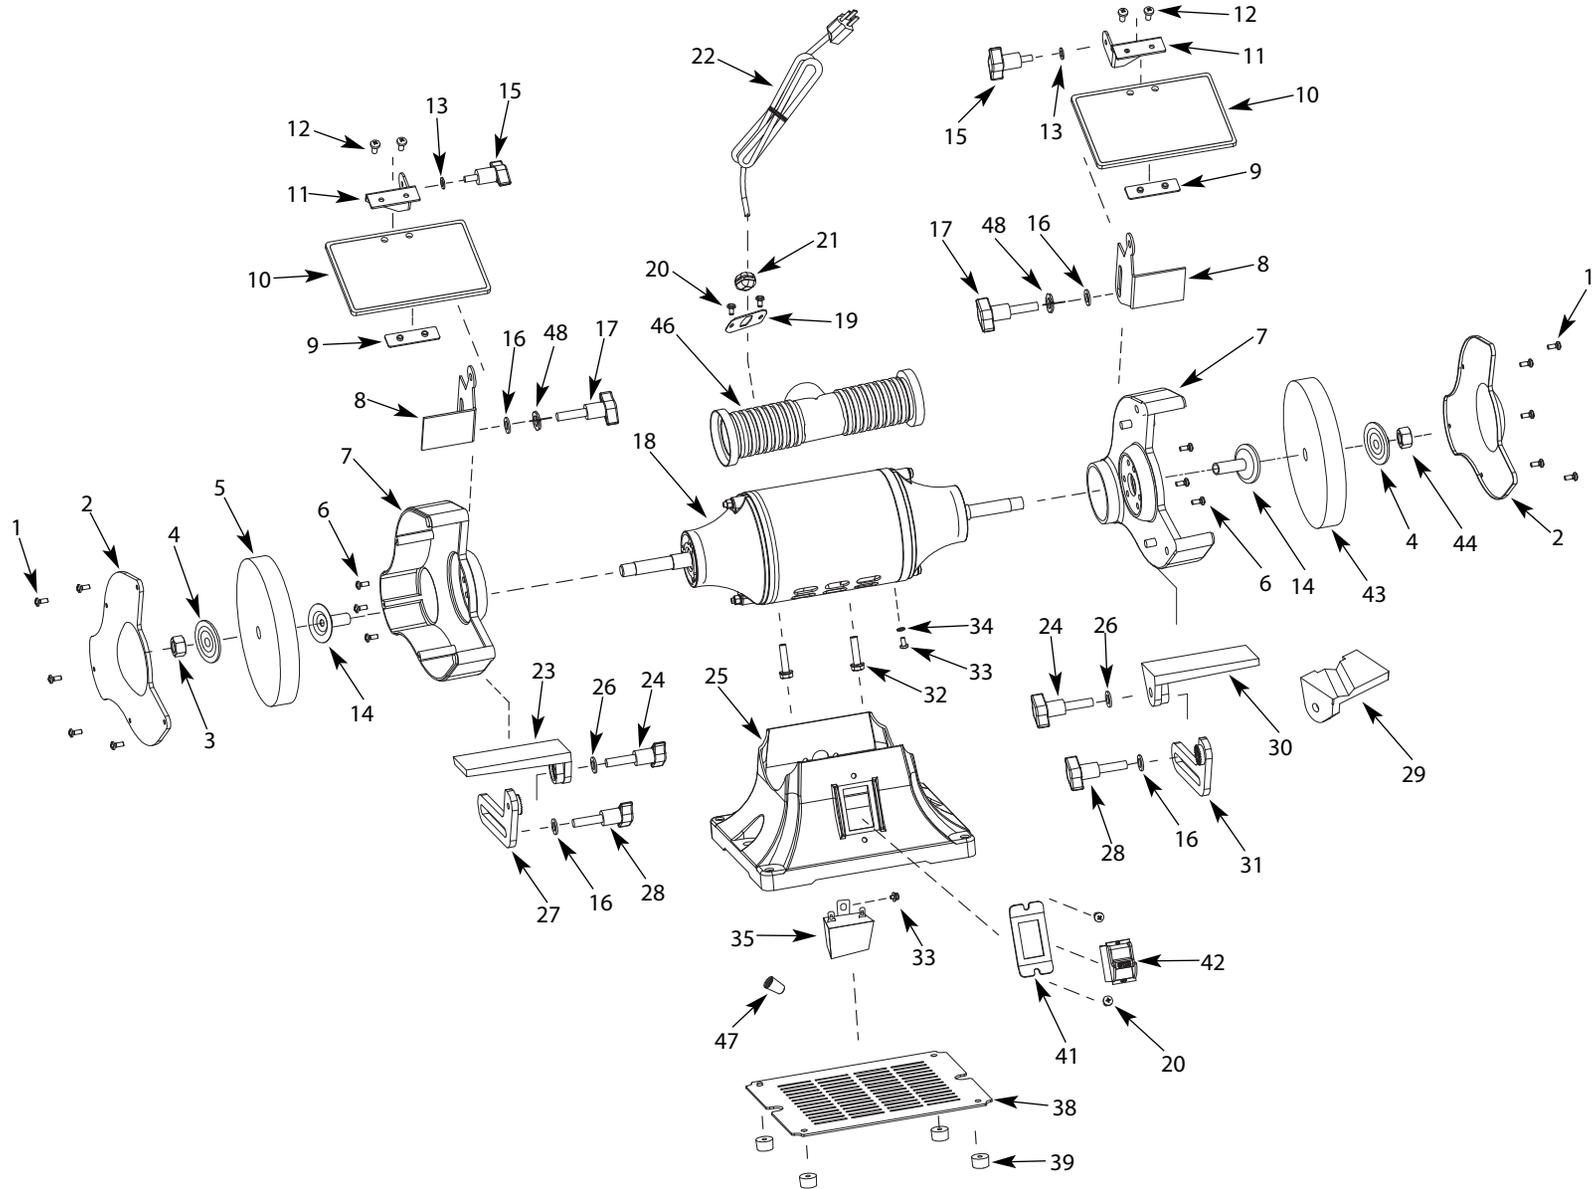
Repair Parts Illustration for 9682072A, 6" Bench Grinder
